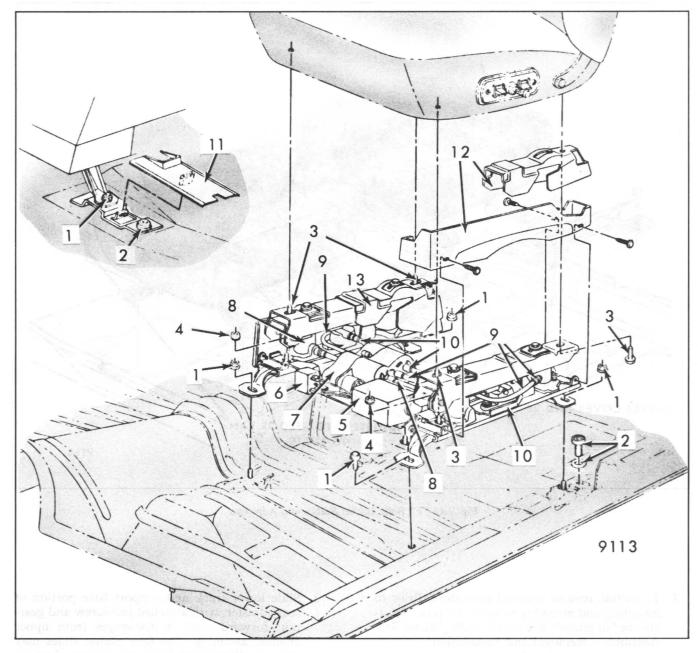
"A" Body Six-Way Power Operated Driver's Bucket Seat and Adjusters
